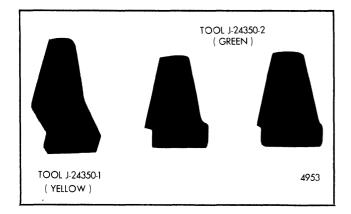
Glass Alignment Gauge Blocks - Tool J-24350 or Equivalent
